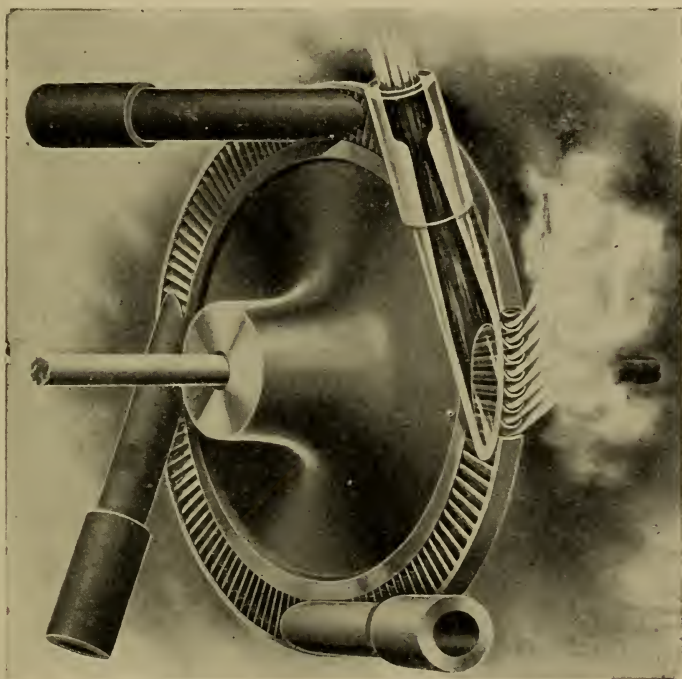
The De Laval Turbine Wheel and Nozzles.
